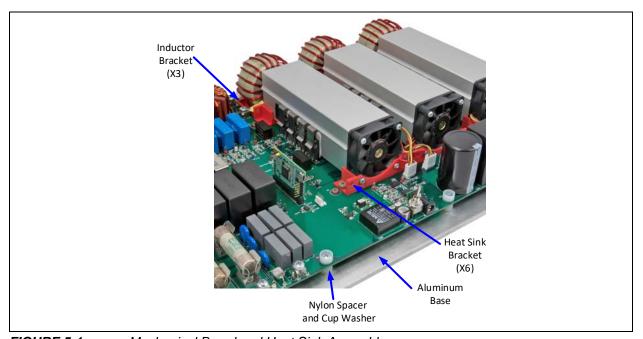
Mechanical Board and Heat Sink Assembly.
